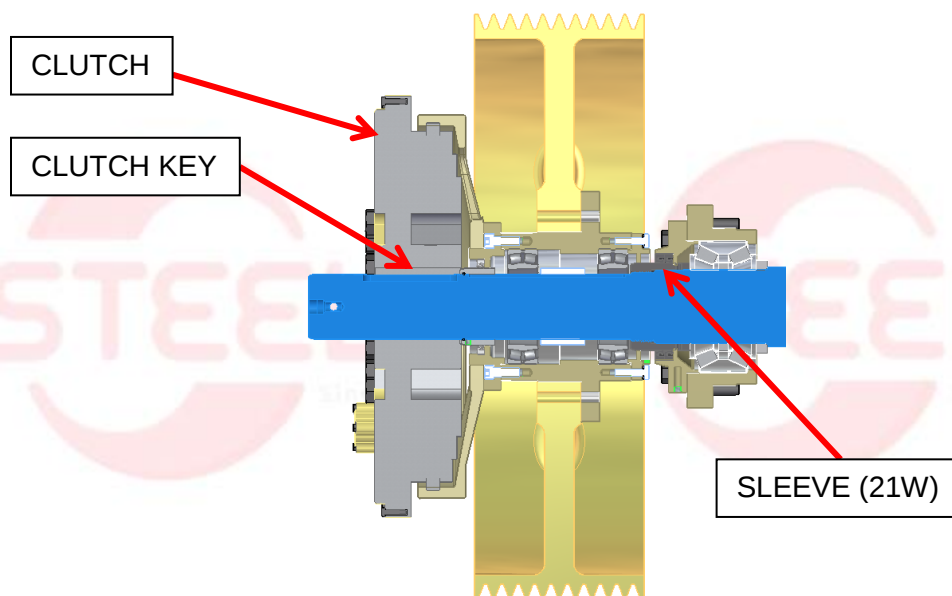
Cross-section of pulley shaft assembly showing the sleeve (21W)
